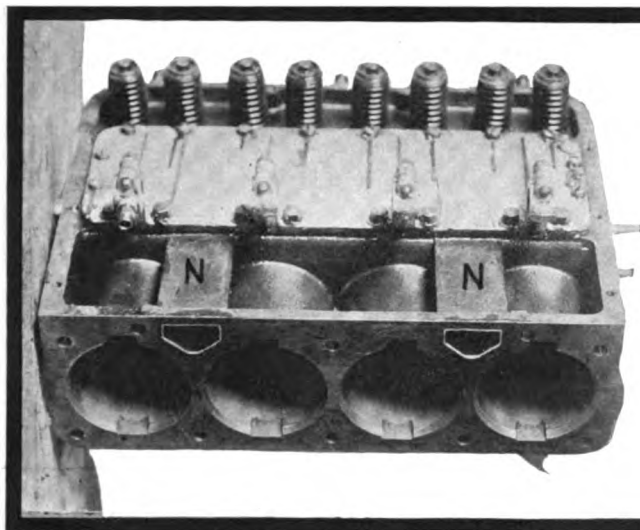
Duesenberg-Mason motor with intake passages N which connect with the integral manifold in the crankcase and deliver direct to the cylinders. These passages register with openings N in the crankcase, Fig. 9
